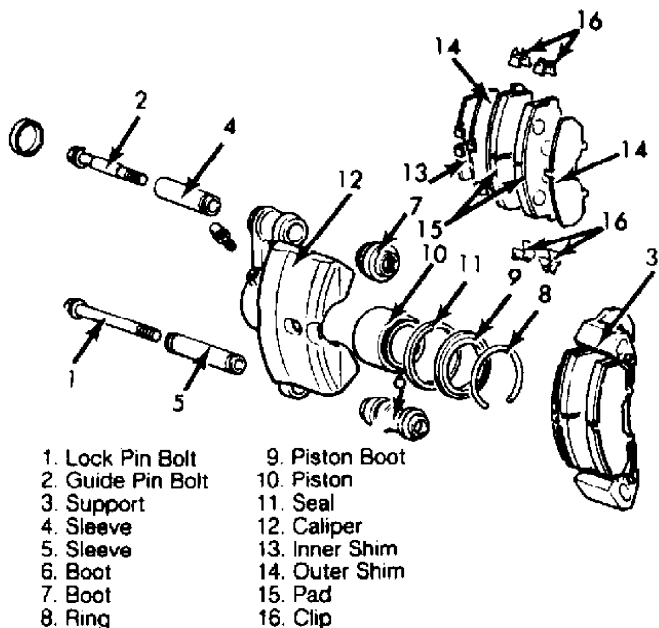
Exploded View Of Front Disc Brake Assembly (Typical Single Piston)
